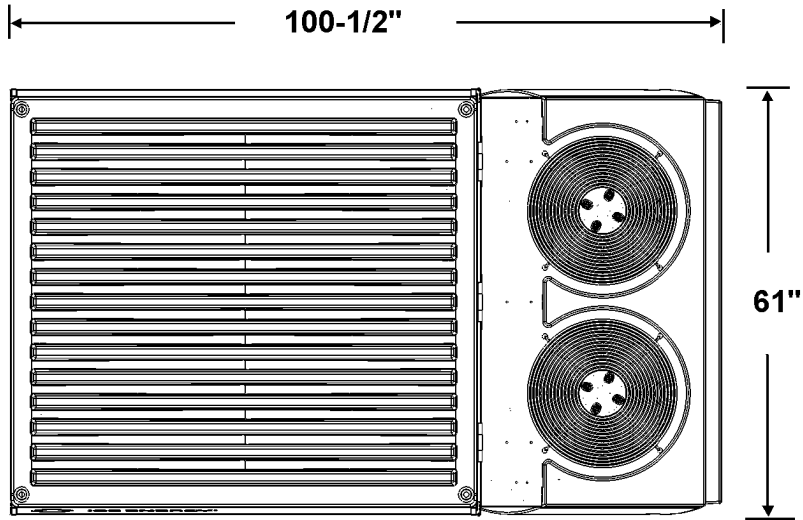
Ice Bear<sup>®</sup> 30 Unit Dimensions Top View
